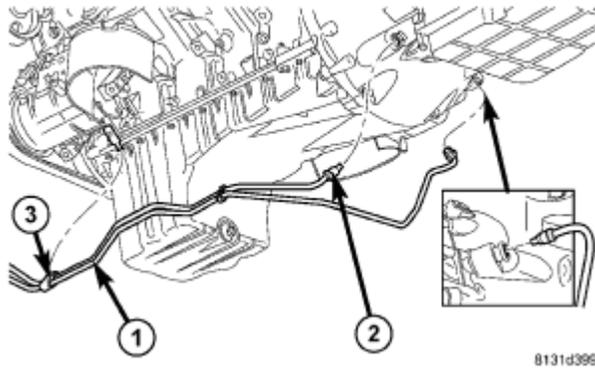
Disconnecting Transmission Fluid Cooler Lines At Transmission Fittings And Clips
